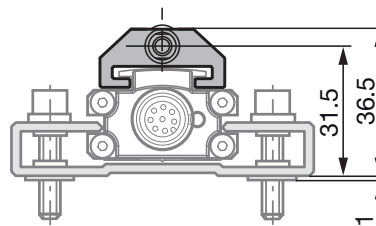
Dimensions and distances with BTL5-T-2814-1S magnet
